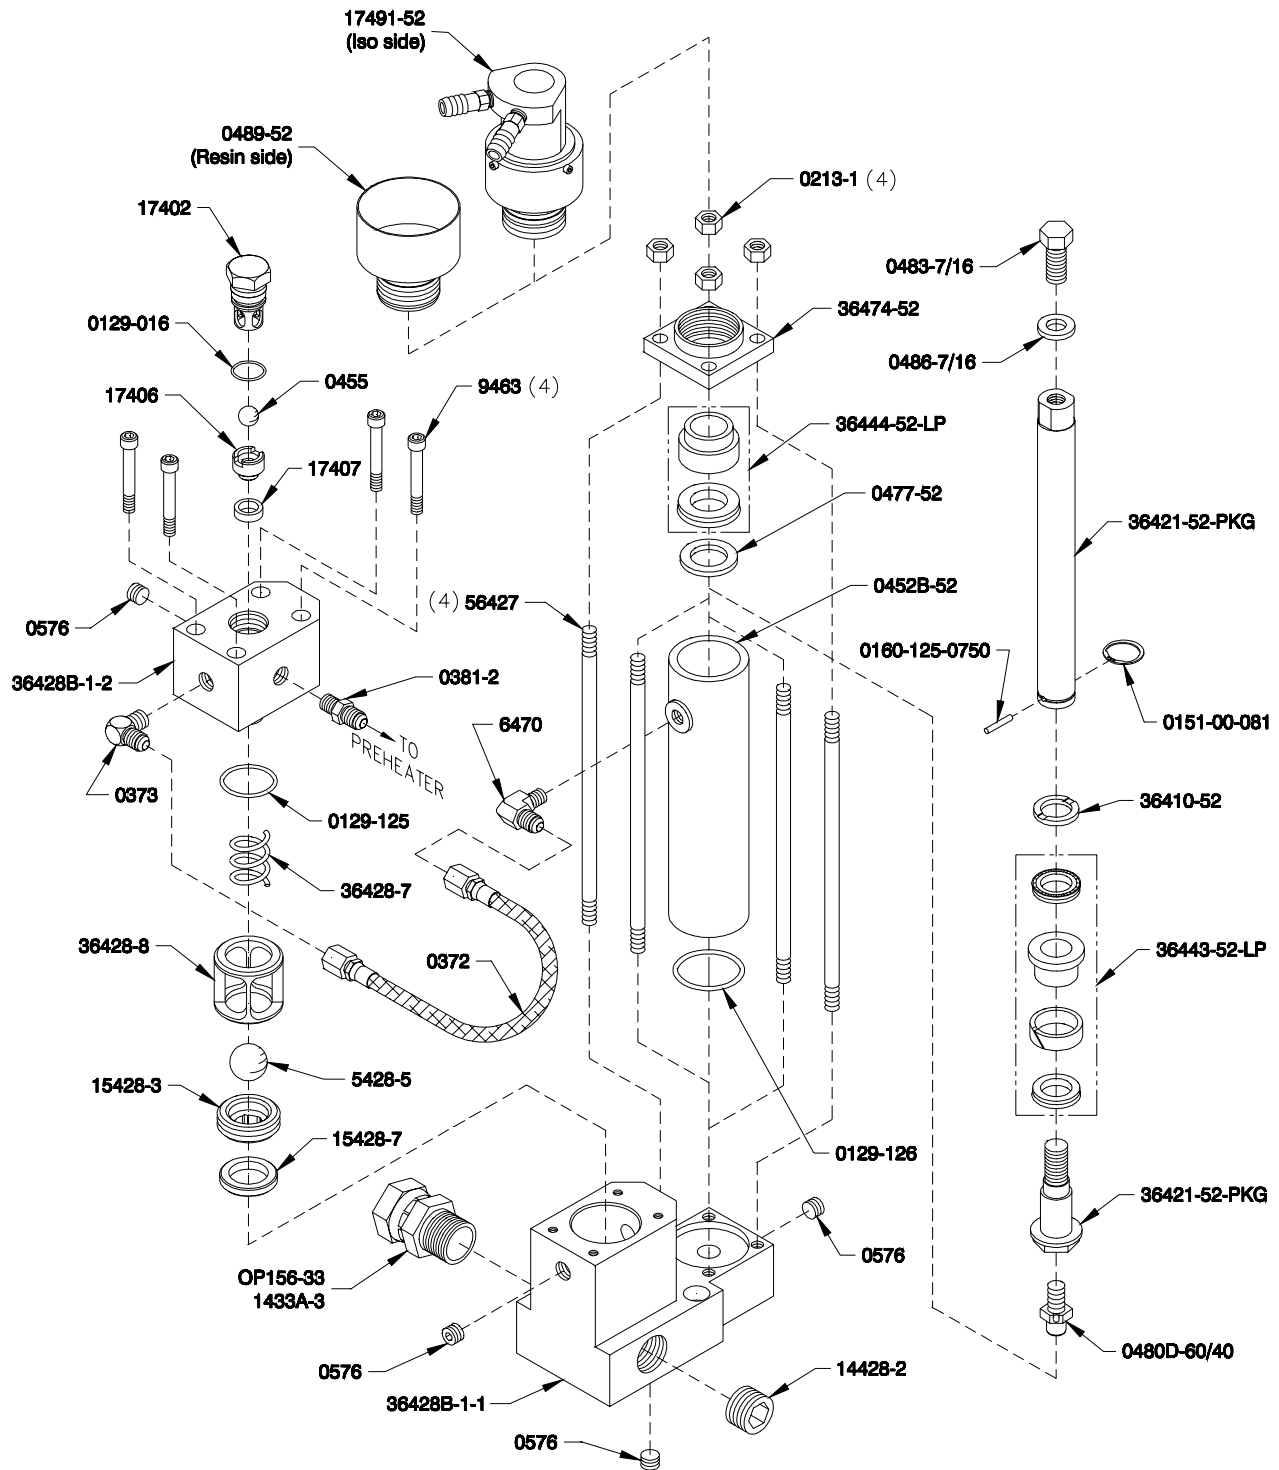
Proportioning Pump Assembly, (Part No. 18400/18450A-60), Exploded View
